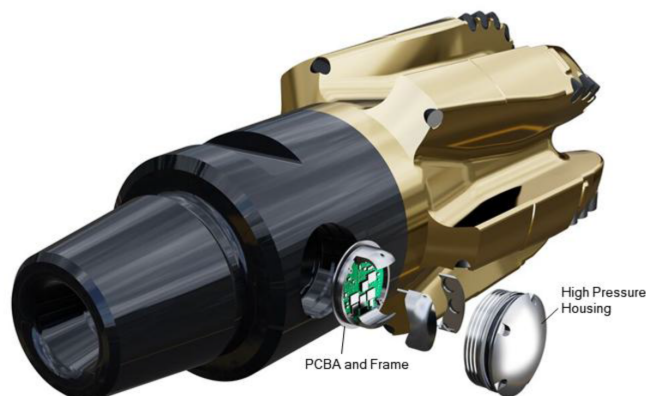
Exploded view of in-bit sensing device installed into drill bit.
